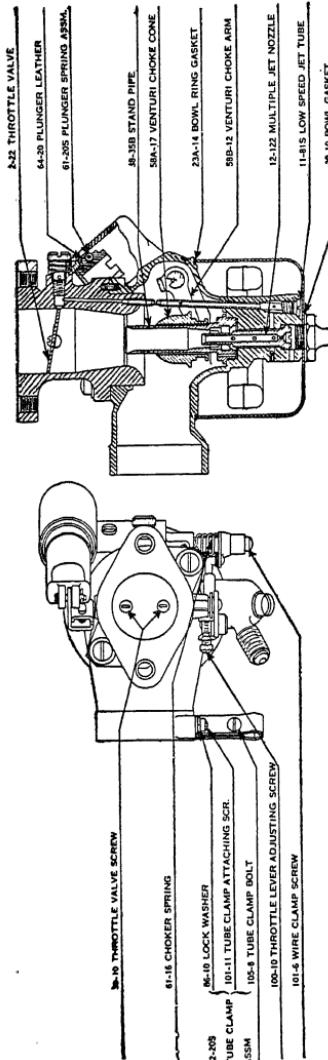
Top View (left) and Sectional View (right) of Chrysler-Plymouth Carburetor
